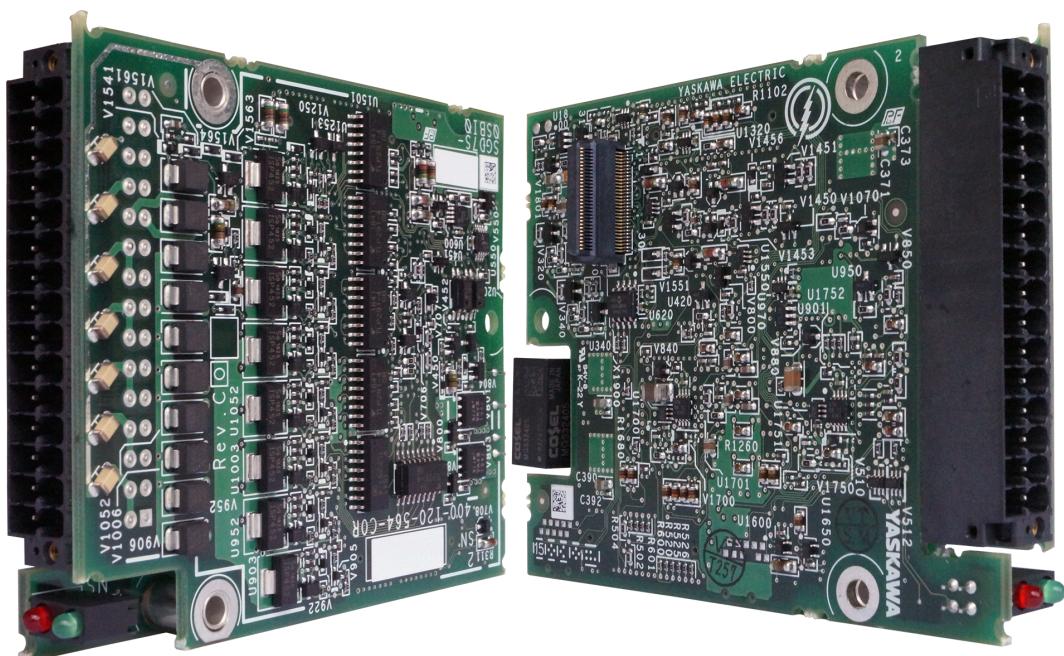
SGD7S-OSB02A - Perspective View of Both Boards (Frontside / Backside)
